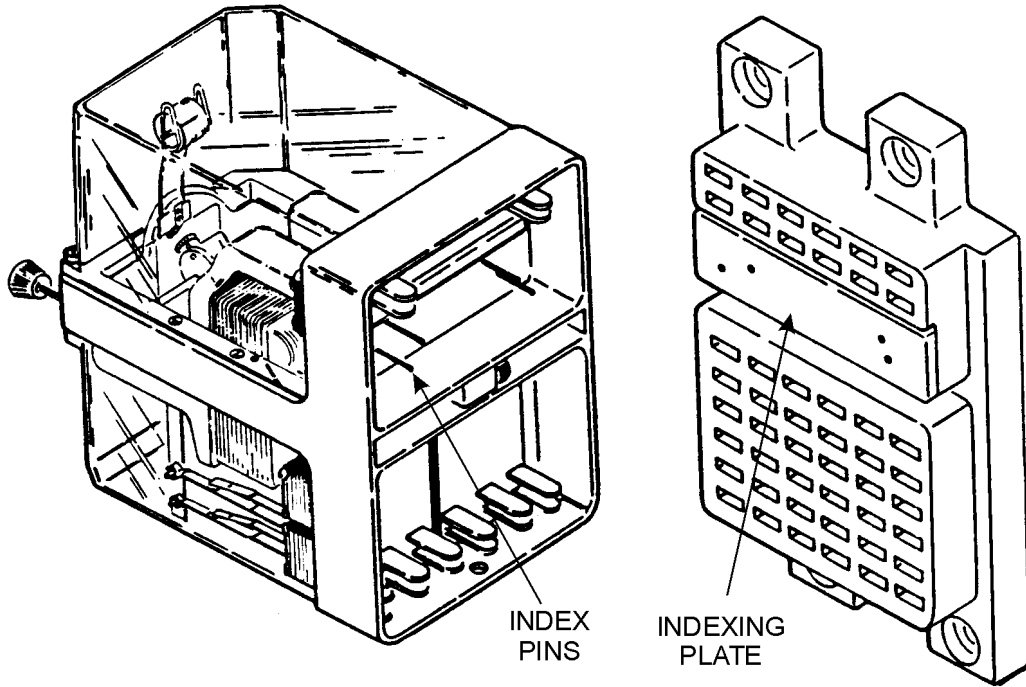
Typical Plug-In Relay and Mounting Base
